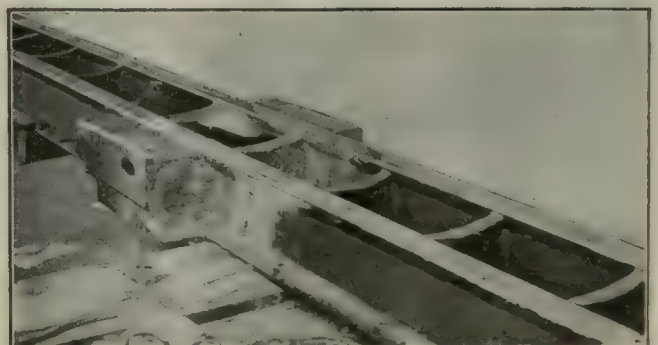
WELD ON LARGE PLANING-MACHINE BED
